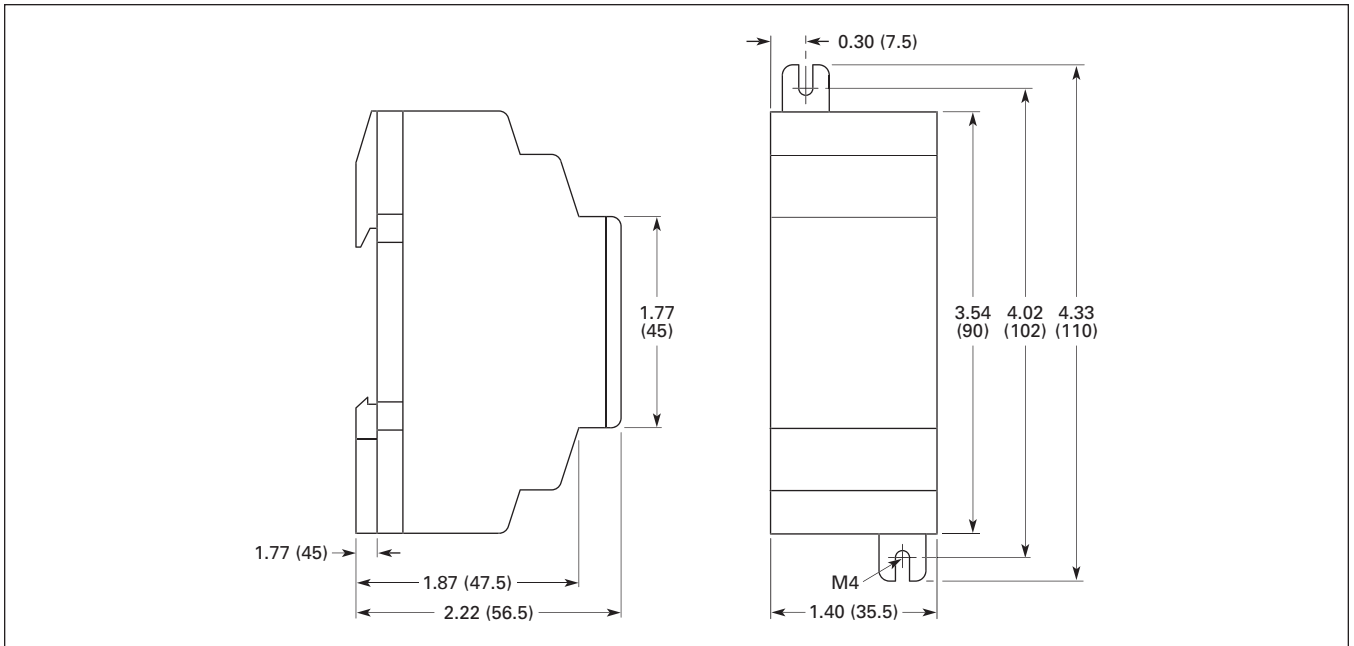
EZ256-HCI Dimensions in Inches (mm)
